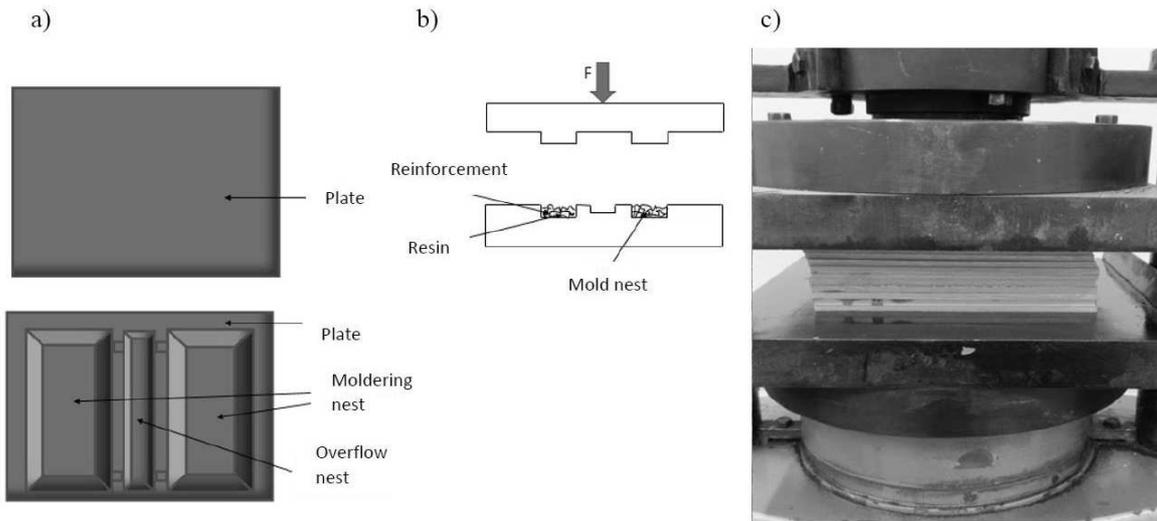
Project of mould (a), sectional view (b), view of mould mounted on pressing station (c)
